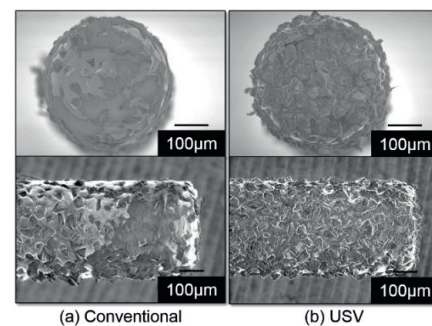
Scanning electron microscopy image of tool bottom and side after machining 20 holes under optimum cutting conditions.
